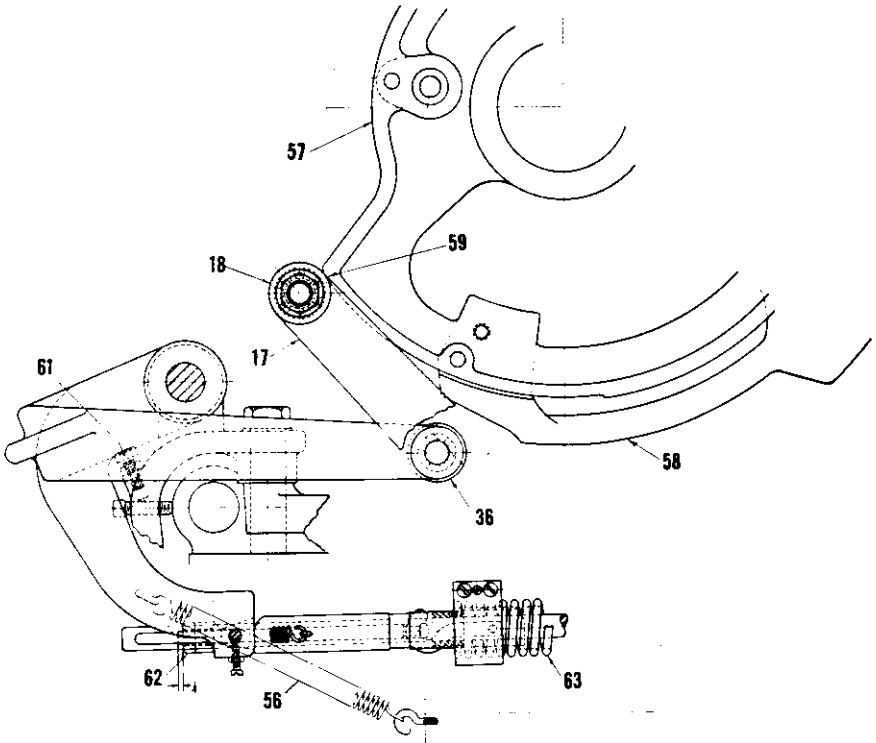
Left-hand side view of the extra pressure cam and lever, with main quadding cam holding roll 18 at start of high contour.
